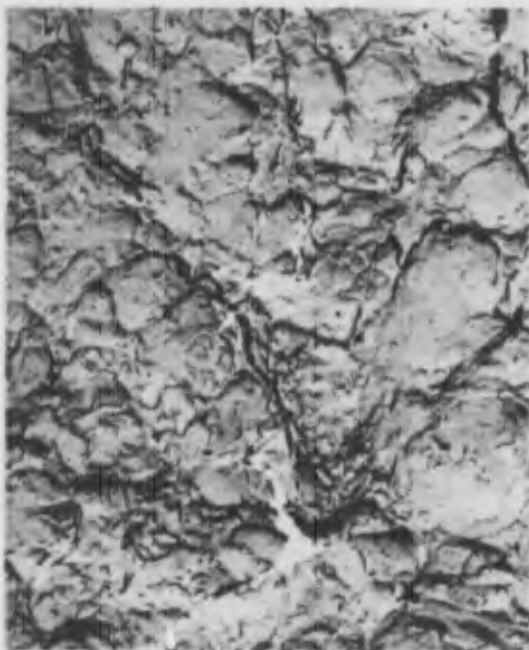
Fracture Face and Electron Fractographs of H-11 Modified Specimen B90, $K_{IC} = 40.2$, 9868 Minutes in 3½% NaCl Solution
